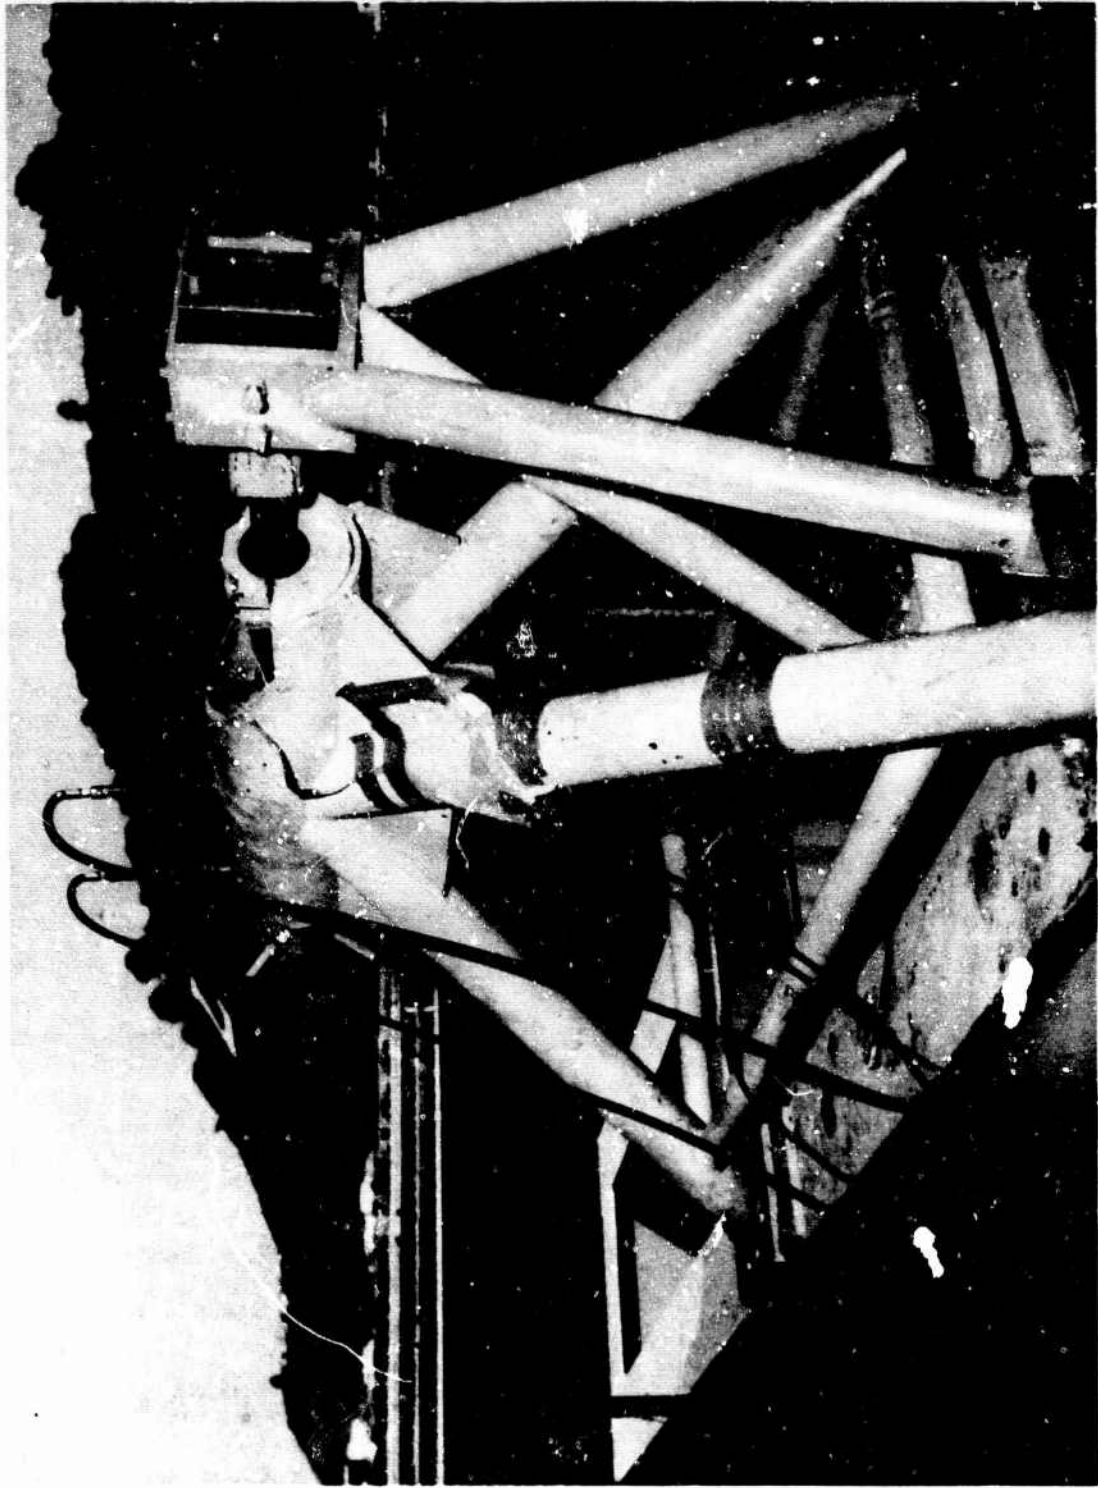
Blade Root-End Fatigue Test Fixture - Centrifugal Loading System.
